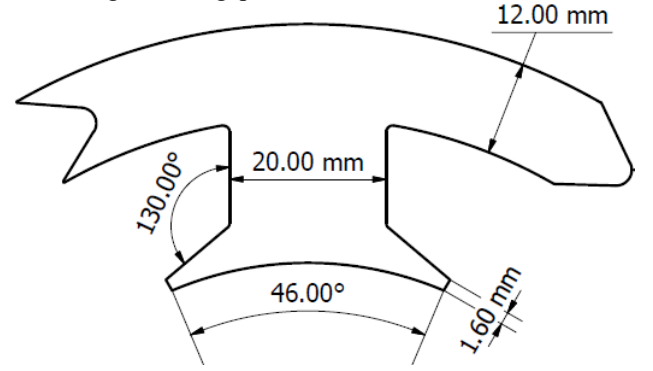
Stator segment (showing key dimensions and interlocking features)
